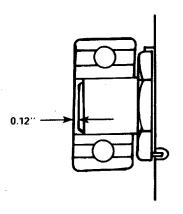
Pilot Bearing (PTO/SP-214).
